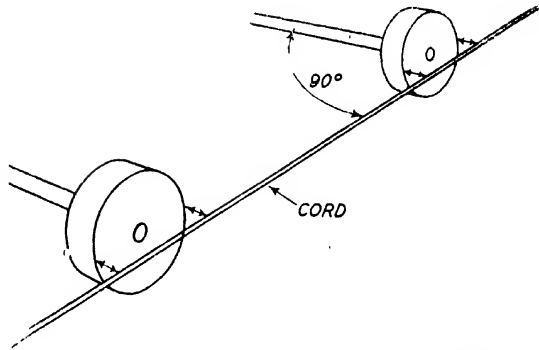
USING A LINING-UP CORD FOR ALIGNING BELT, ROPE, CHAIN, OR GEAR DRIVE
